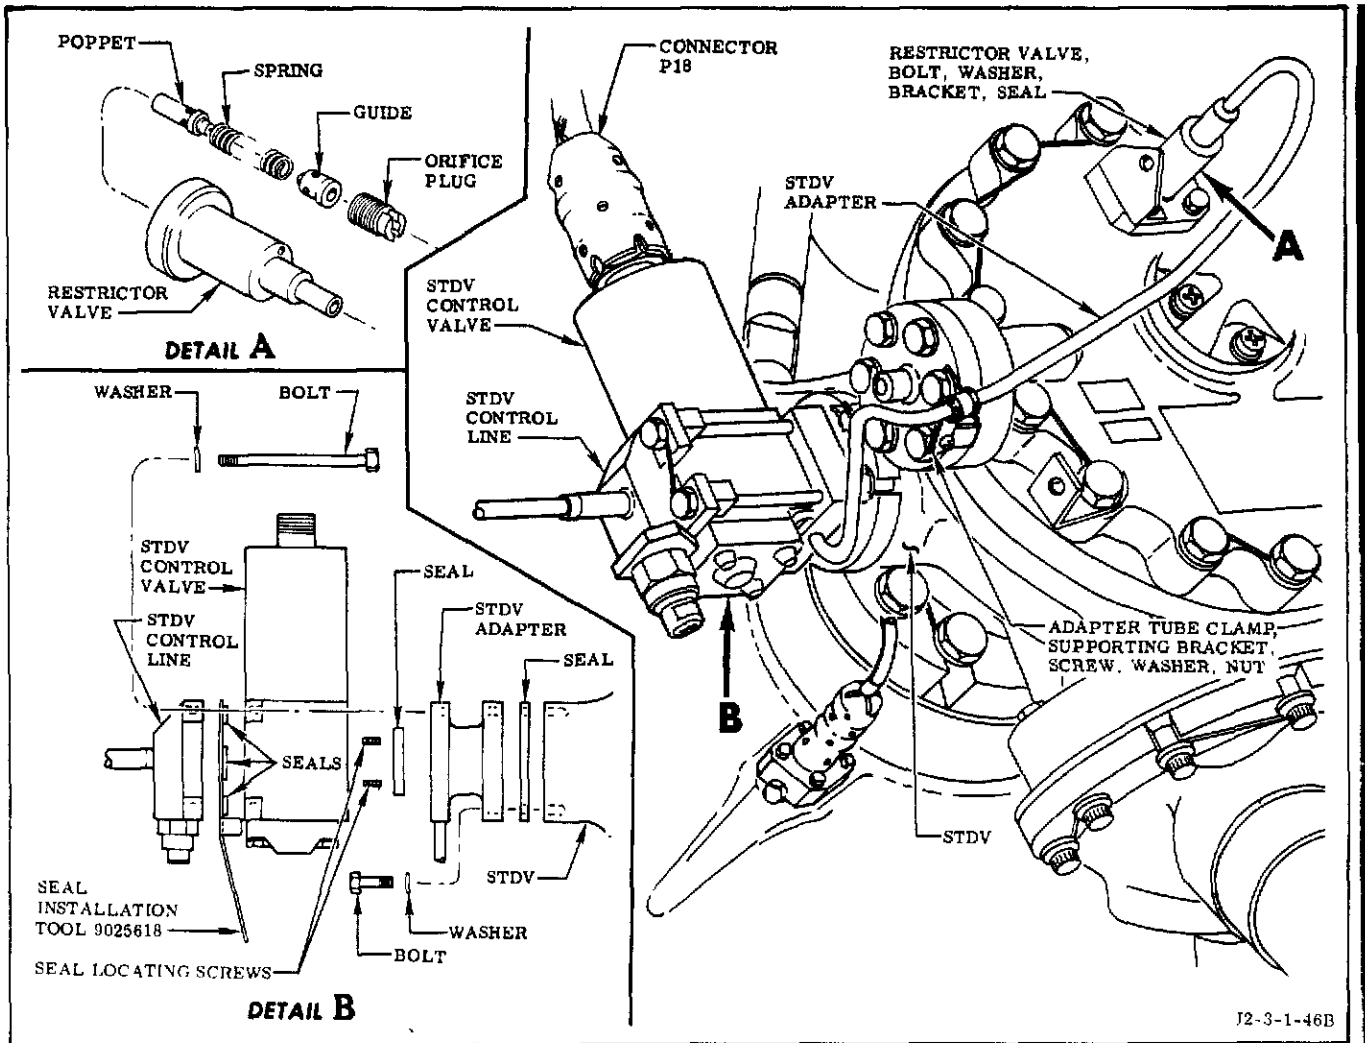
Start Tank Discharge Valve Control Valve and Adapter
